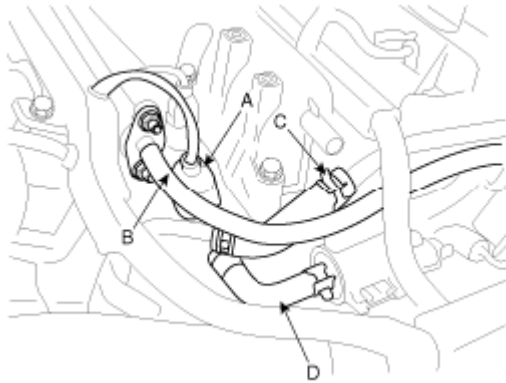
Identifying CMP Sensor Connector, Fuel Hose, Brake Booster Vacuum Hose And PCSV Hose
